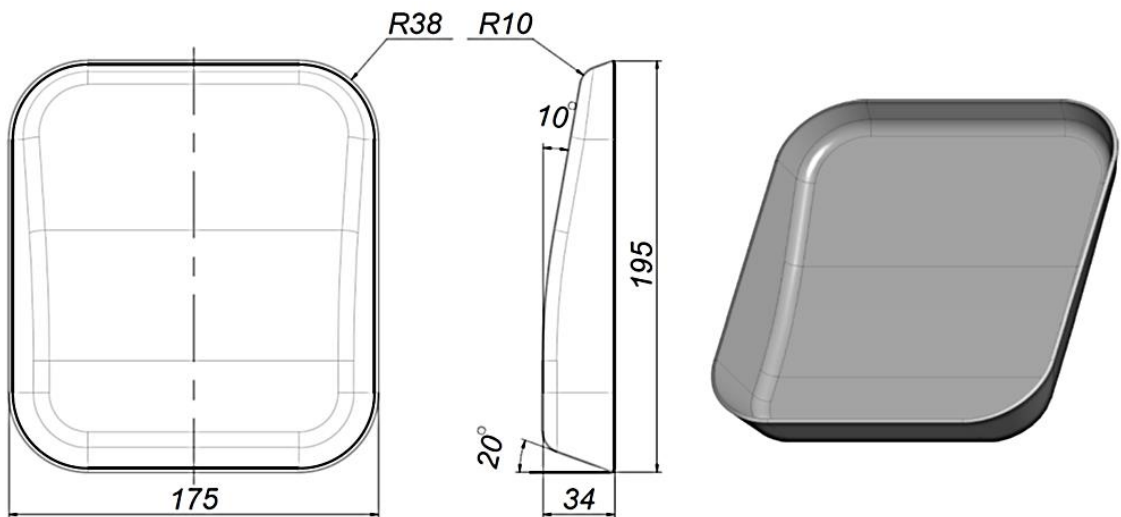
1: geometry of the component for case study 1, dimensions in mm (left) and 3D view (right).
